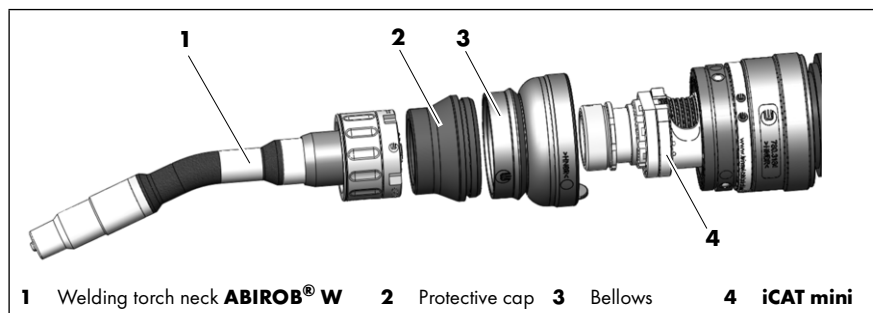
Cleaning - iCAT mini with welding torch neck ABIROB® W
